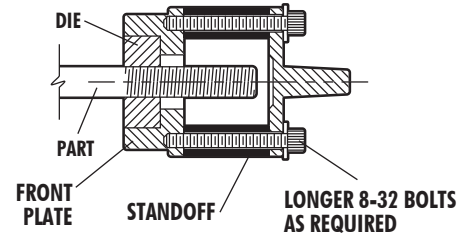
A longer thread can be cut by using standoffs between the front and back plates.
